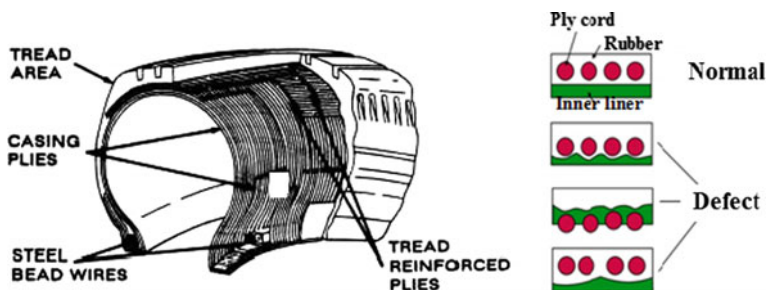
Radial tire cross-section and possible defects due to components displacement during mold heat vulcanization
